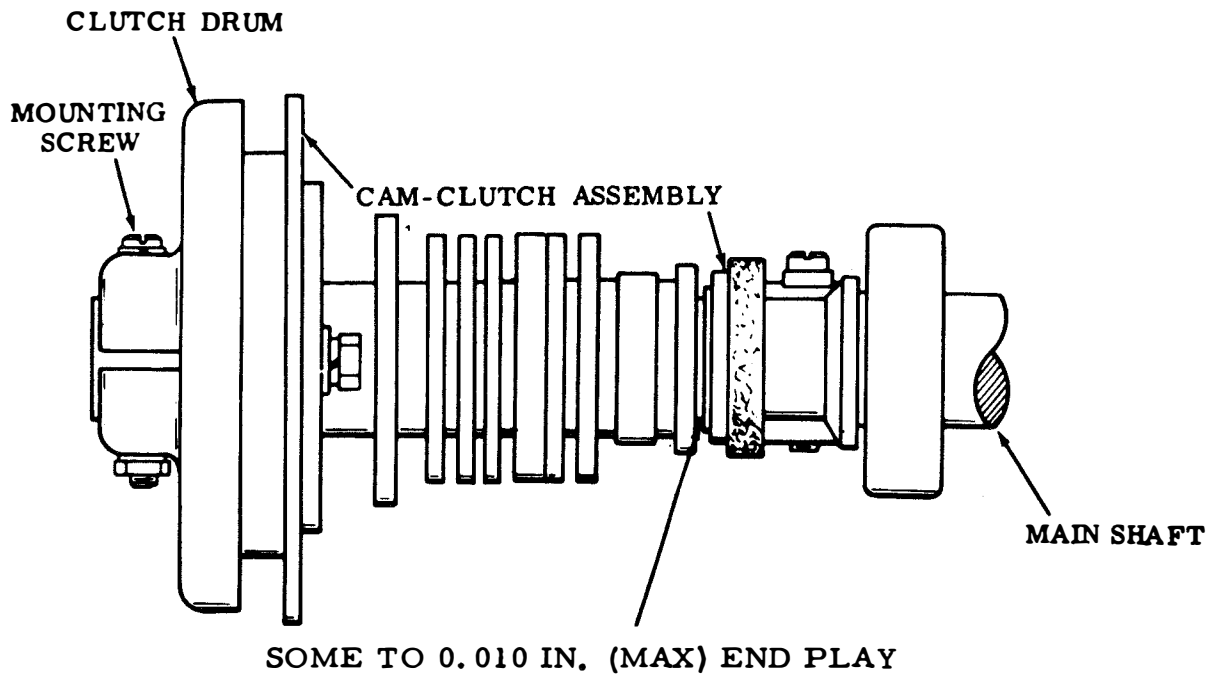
Selector Clutch Drum End Play - Right Side View
